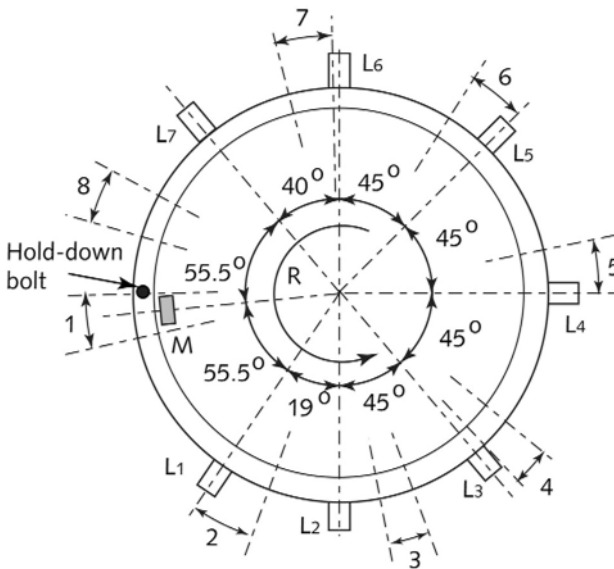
Layout of machine showing leg and bearing damage locations on the inner (fixed) bearing surface. The L numbers represent support leg locations, M is the motor drive location, R is the machine rotation direction and the damage locations numbered 1 to 8 were measured arbitrarily from the first hold-down bolt near the location of the motor drive
